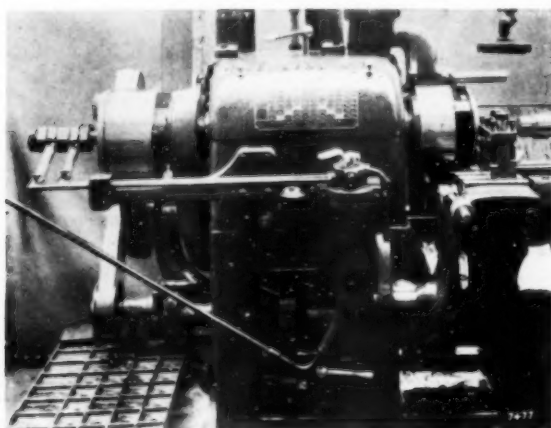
Air Chuck and Actuating Mechanism as applied to a Herbert Automatic Chucking Machine.
